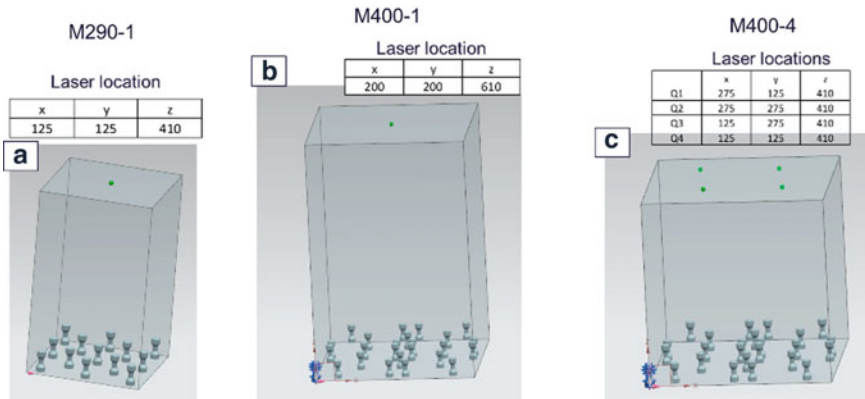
Laser coordinates for EOS machines a M290-1, b M400-1, and c M400-4
